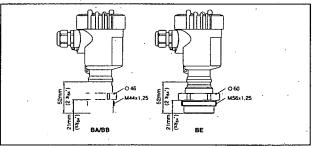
VEGABAR 64, threaded fitting for the paper industry: BA/BB = M44x1.25; BE = M 56x1.25
